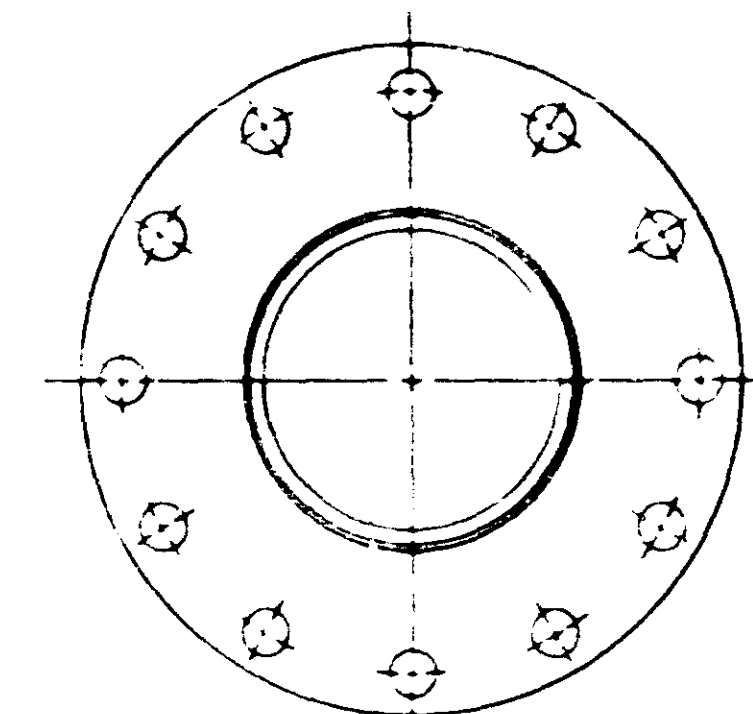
" W.M. THRU PIERS ON THE THIRD AVENUE BRIDGE
